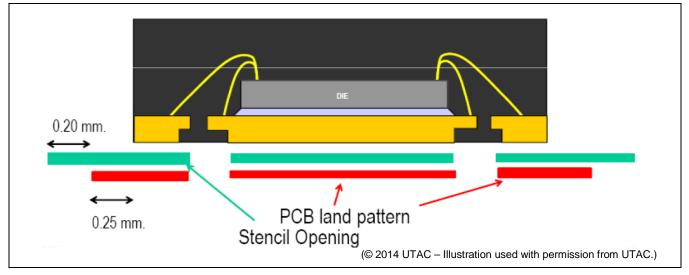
illustrates a suggested footprint for printed circuit board (PCB) designs using the ZSC31150 DFN14.
